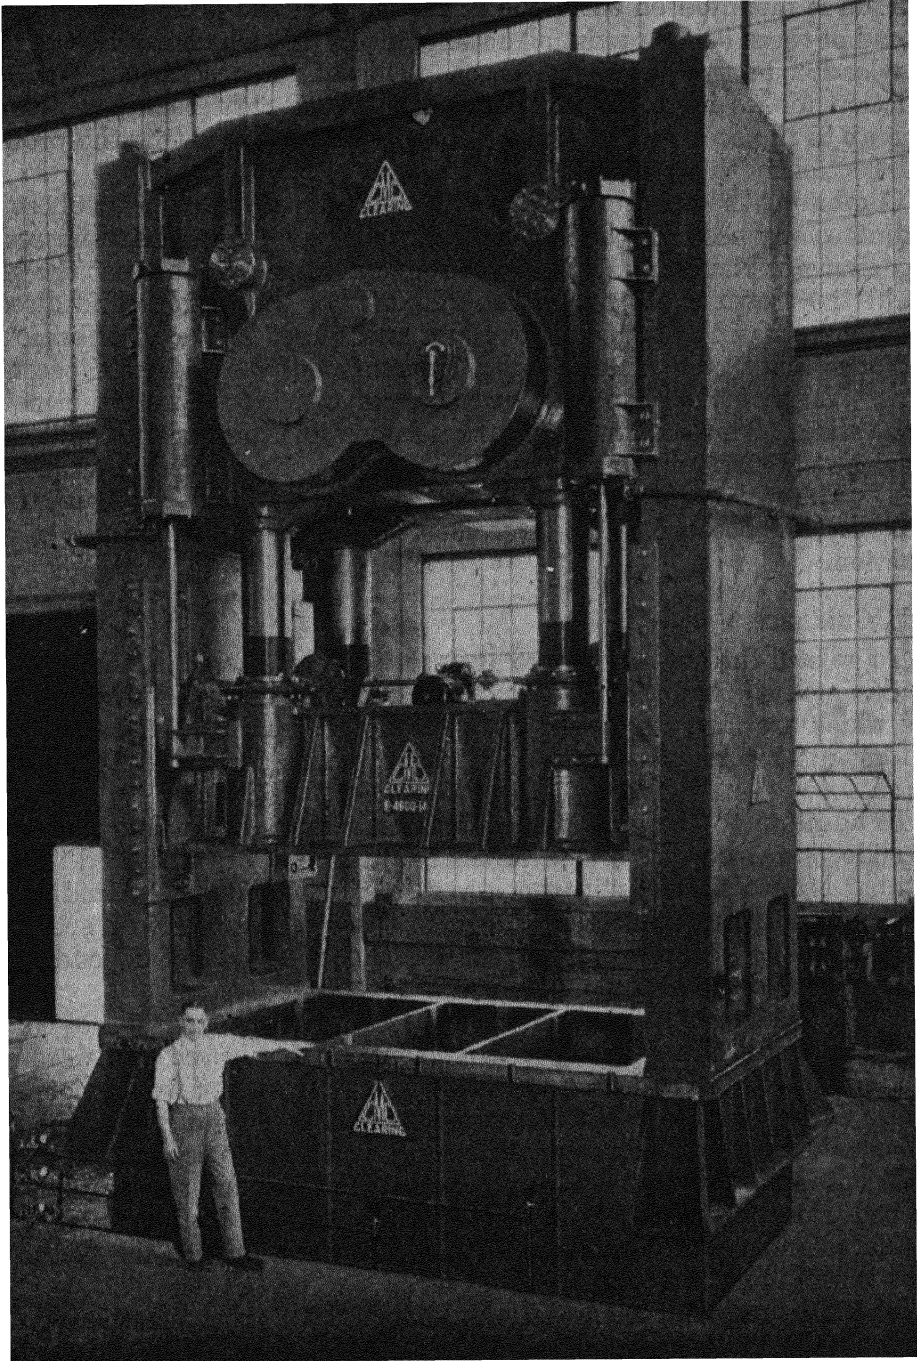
CRANKLESS PRESS FOR THE MOTOR INDUSTRY
